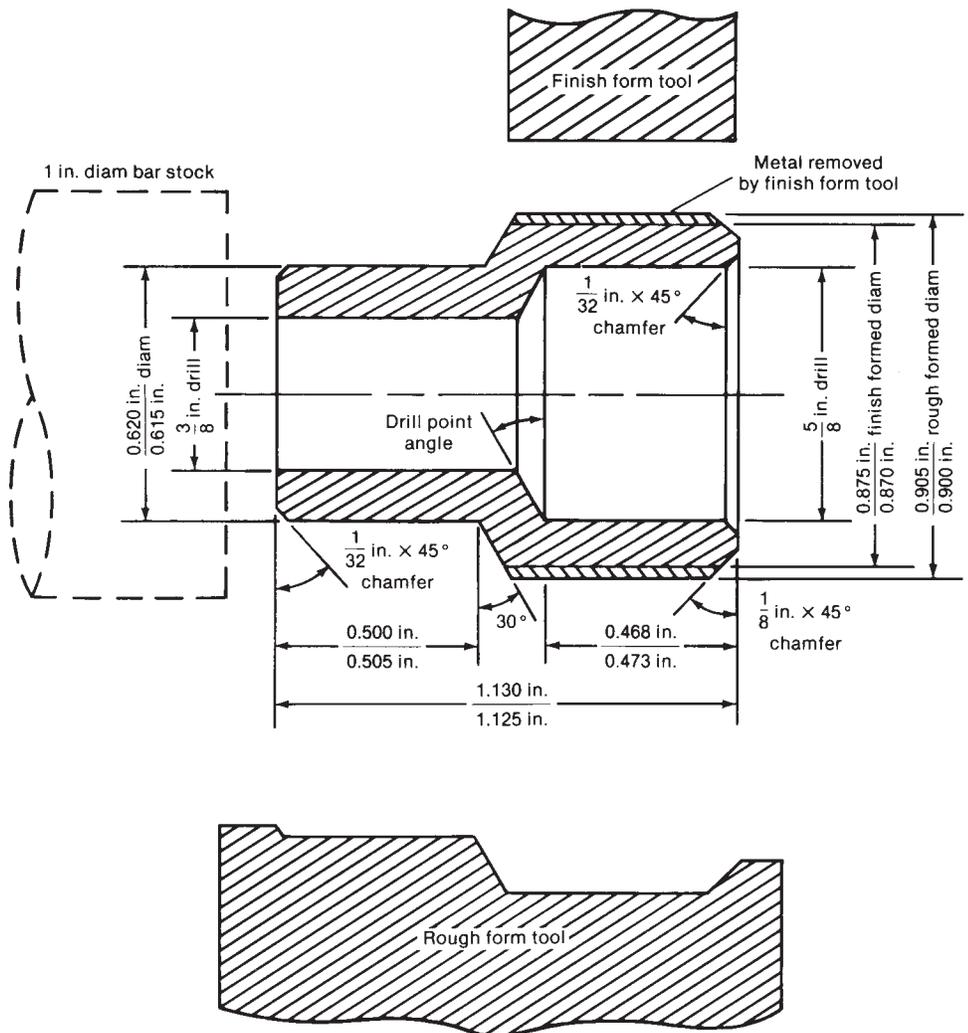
Details of the ASTM E 618 machinability test specimen and the relative position of the form tools. As shown in this figure, the standard automatic screw machine part is designed to be made from 25 mm (1 in.) diam bar stock. The part used in the machinability tests for brasses, steels, and aluminum alloys was downsized to permit use of 19 mm (0.75 in.) diam rod; this is permitted under ASTM E 618, if done for all materials.
